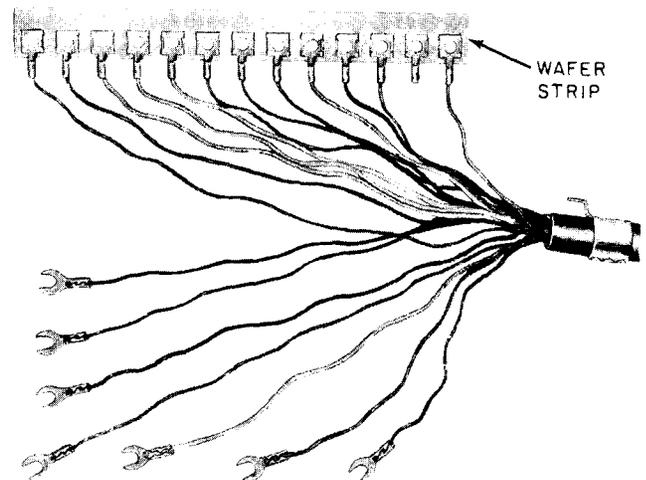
Nonslotted Wafer Strip End of Mounting Cord, Early Type
